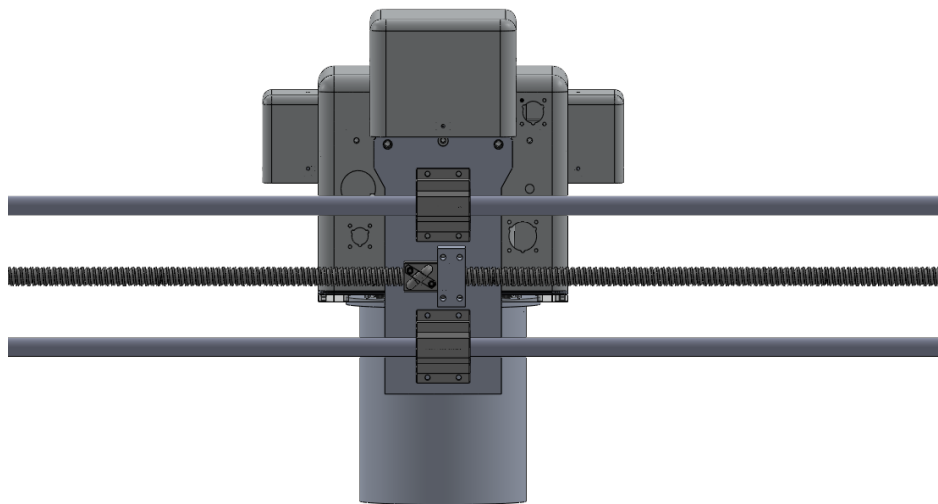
Close-up of GVR mounts. The GVR is mounted to two linear bearings that ride on the support shafts. In the center of the shafts is the ball screw, which drives the ball nut that is attached to the GVR as well. Not shown: cables and corresponding protective carriers.
